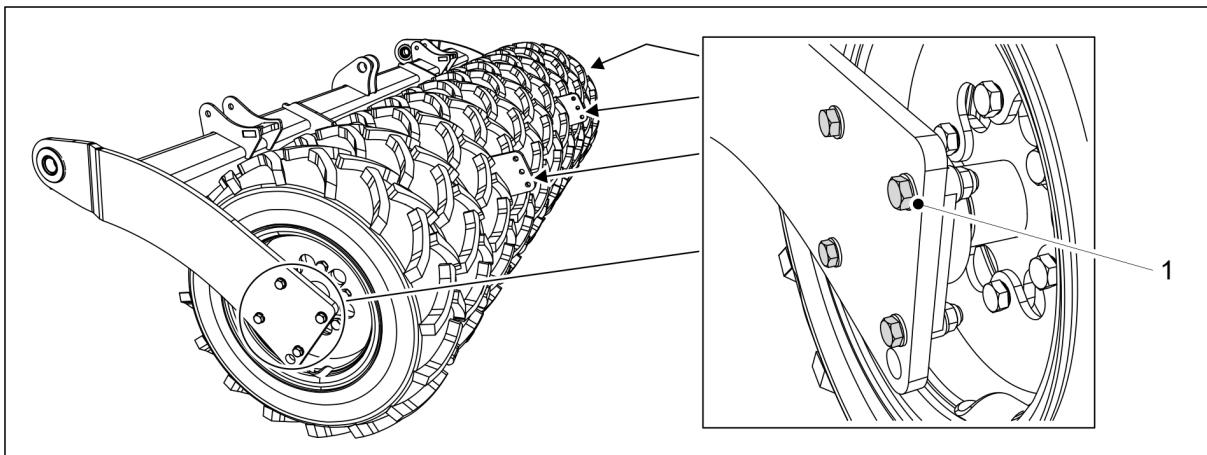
273. Dismounting the wheel assembly
